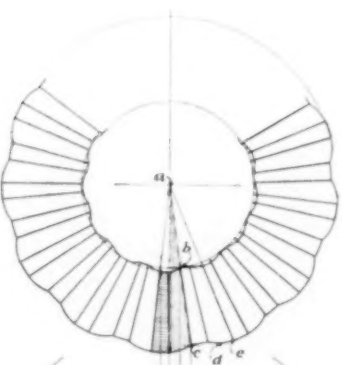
GENERATOR TOOL REPLACING ONE SIDE OF THE MOLDING TOOTH
